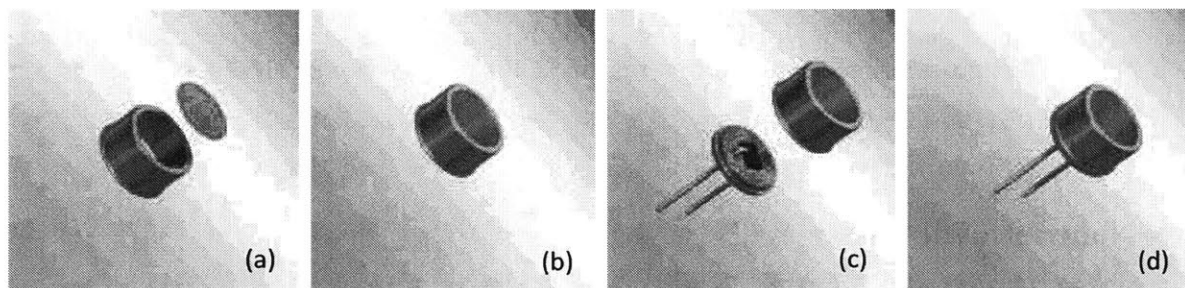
(a-b) A glass window is bonded to the metal cap. Then the (c) metal cap and baseplate are laser welded together to form the (d) final product. Images reprinted with permission of SCHOTT AG [8]. SCHOTT produced and owns all images.
